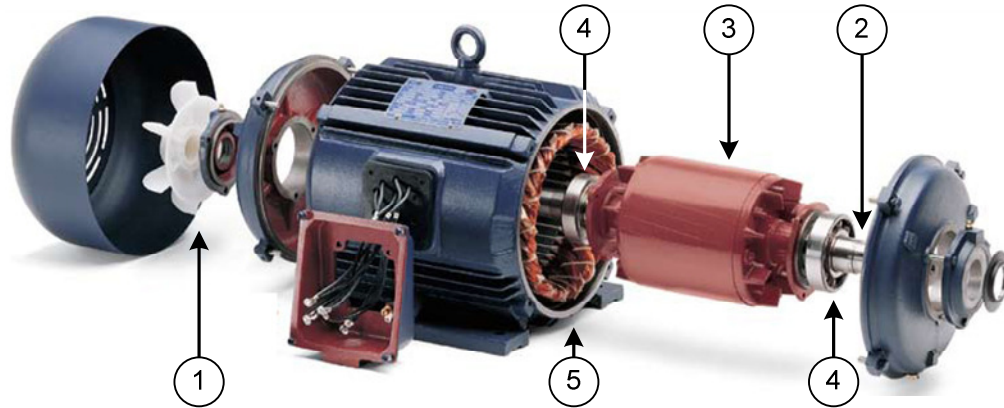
Interior structure (expanded view)³ of a three-phase IM: (1) cooling fan, (2) bearings, (3) rotor, (4) shaft, (5) stator and stator windings.
